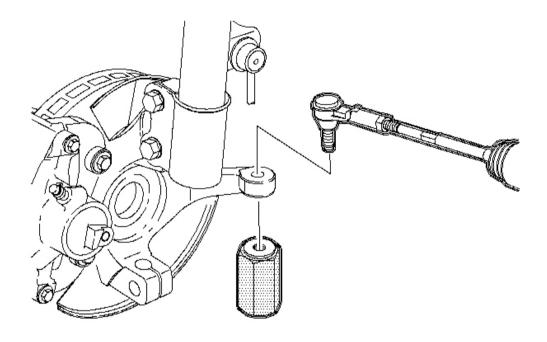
Left Outer Tie Rod & Steering Knuckle Courtesy of GENERAL MOTORS CORP.
